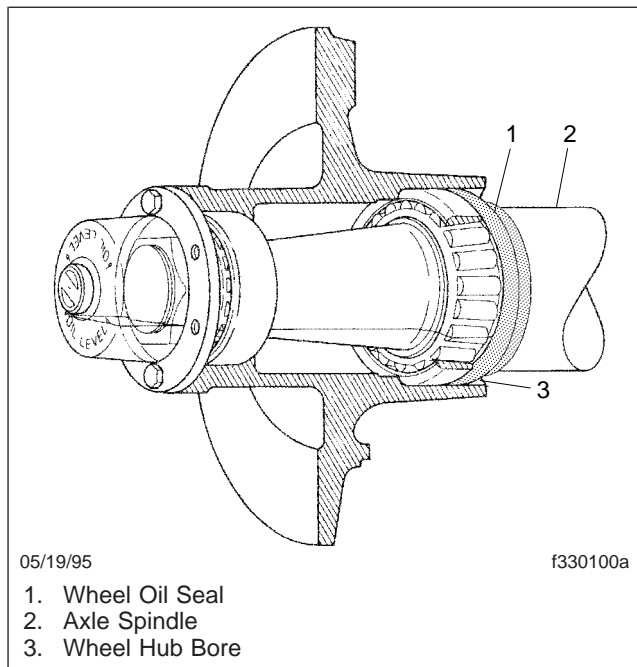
, Spindle-Mounted Wheel Oil Seal, Stemco Seal Shown
